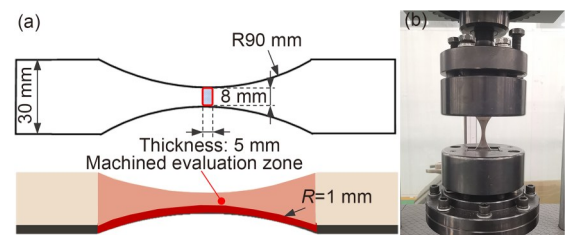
(a) Specimen geometry of fatigue test and test scheme; (b) tensile fatigue test setup
